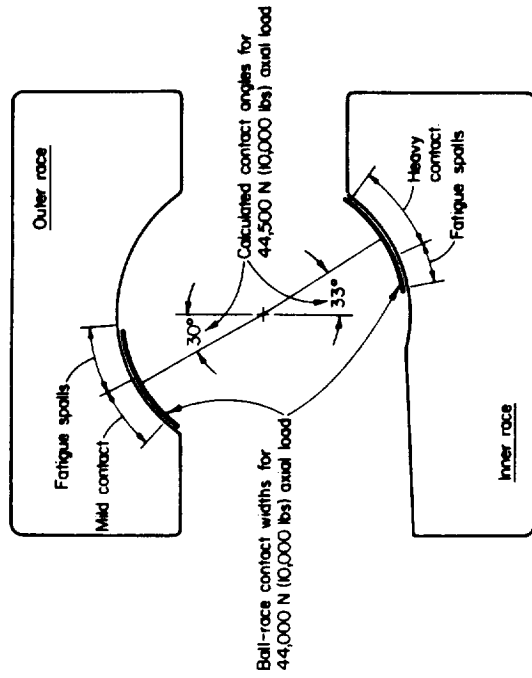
LOCATION OF MEASURED BALL CONTACT PATHS ON USED HPTOP TURBINE-END BEARING SUBJECTED TO EXCESSIVE AXIAL LOADING
